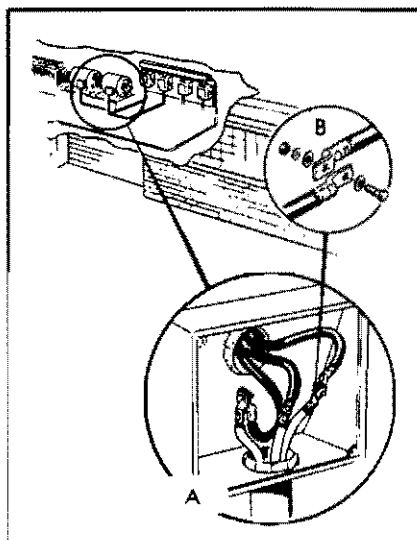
Three methods of making motor connections are shown in detail A. All terminals are preferably aluminum. Where bolt is steel or copper, Belleville washer is necessary (B).
